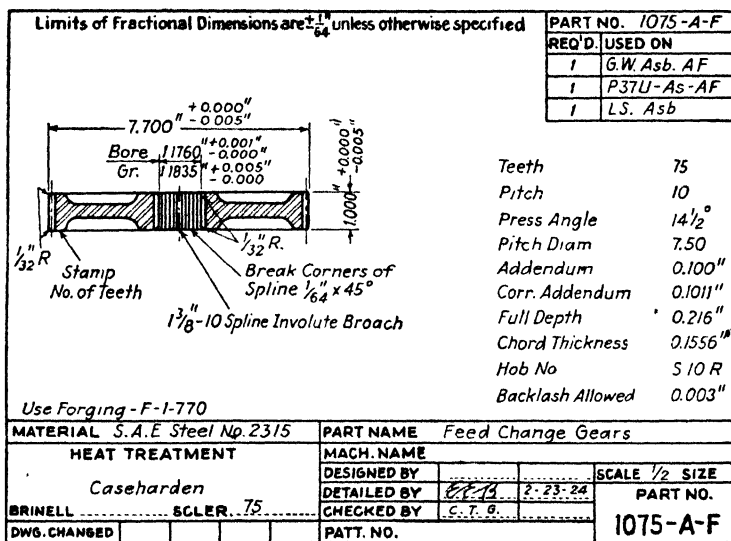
Detail drawing of a change gear, part 1075-AF.
